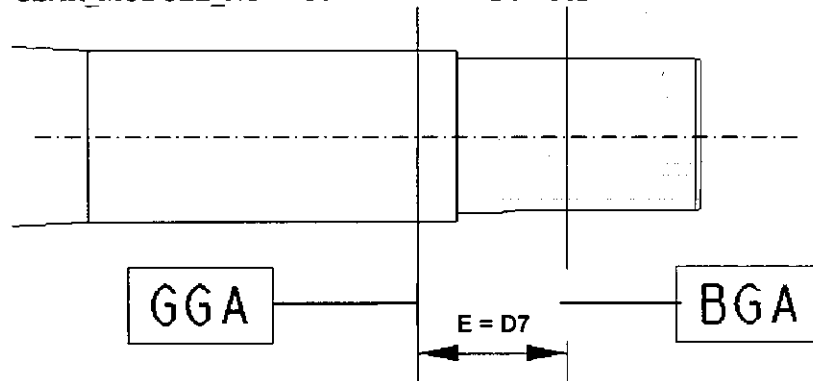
Relation for location of Gear Guard Assembly (E)
